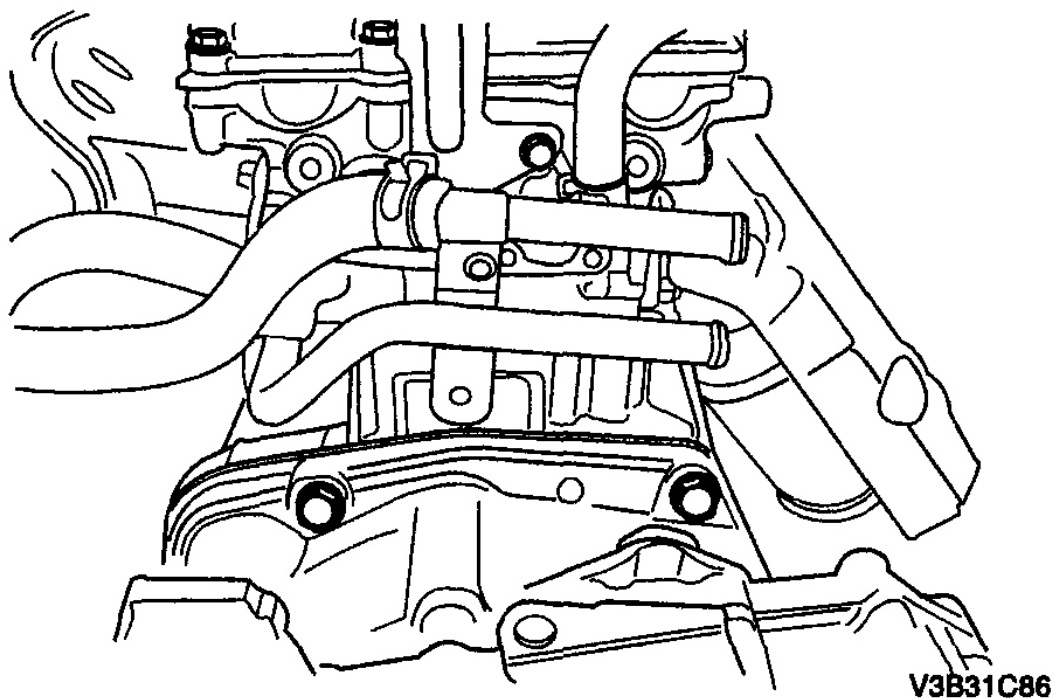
Tightening Transaxle-To-Engine Block Bolts
